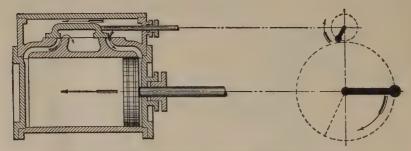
Position of Valve and Cylinder for Crank-End Admission
